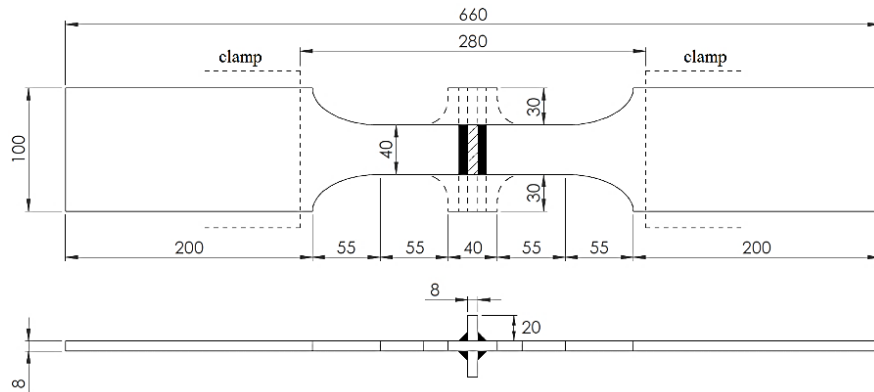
Dimensions of the test specimens (all dimensions in mm) [7].
